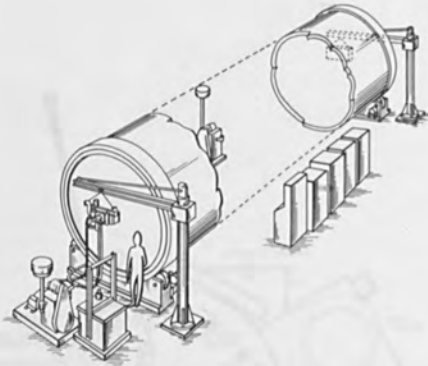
Schematic - out-of-vacuum welding.
